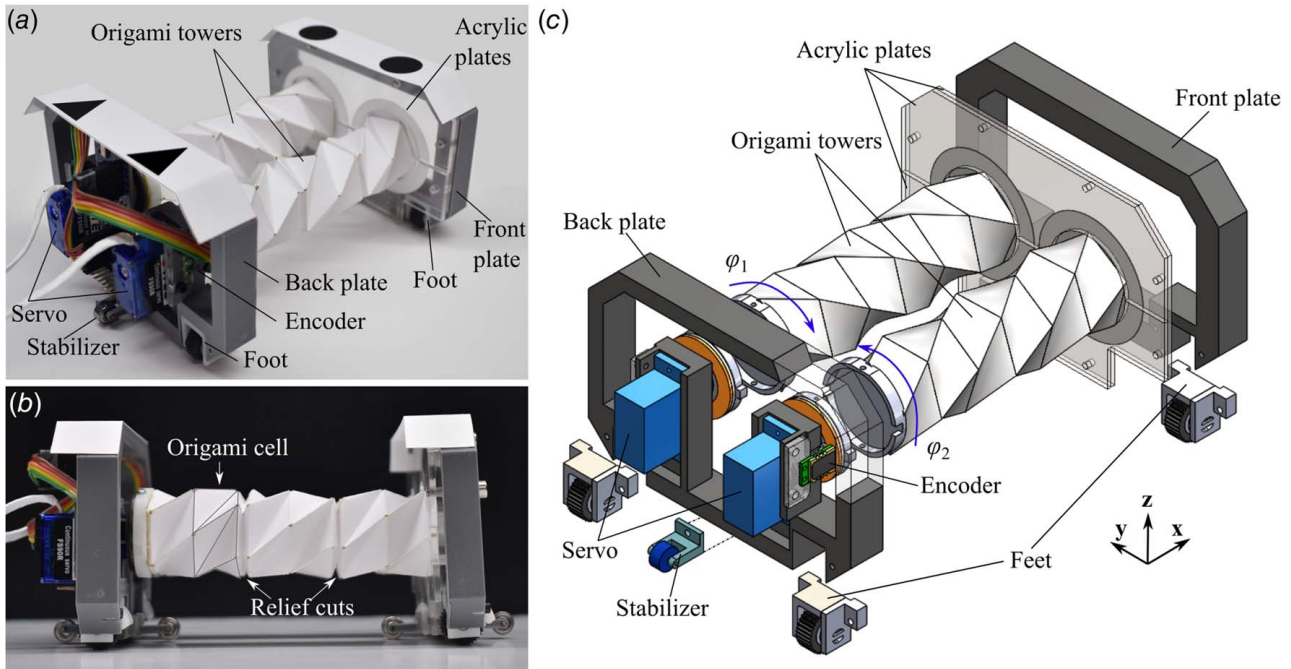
The current OSCAR design showing (a) the main components, (b) a side view, and (c) an exploded CAD view
